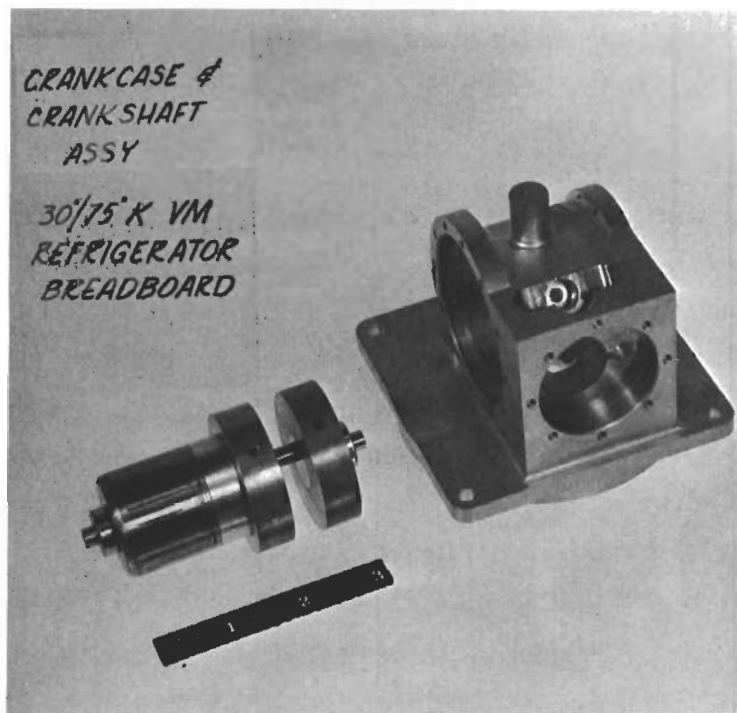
Crankcase and drive mechanism of unit 447550-100 (Hughes photo 4R02918)
